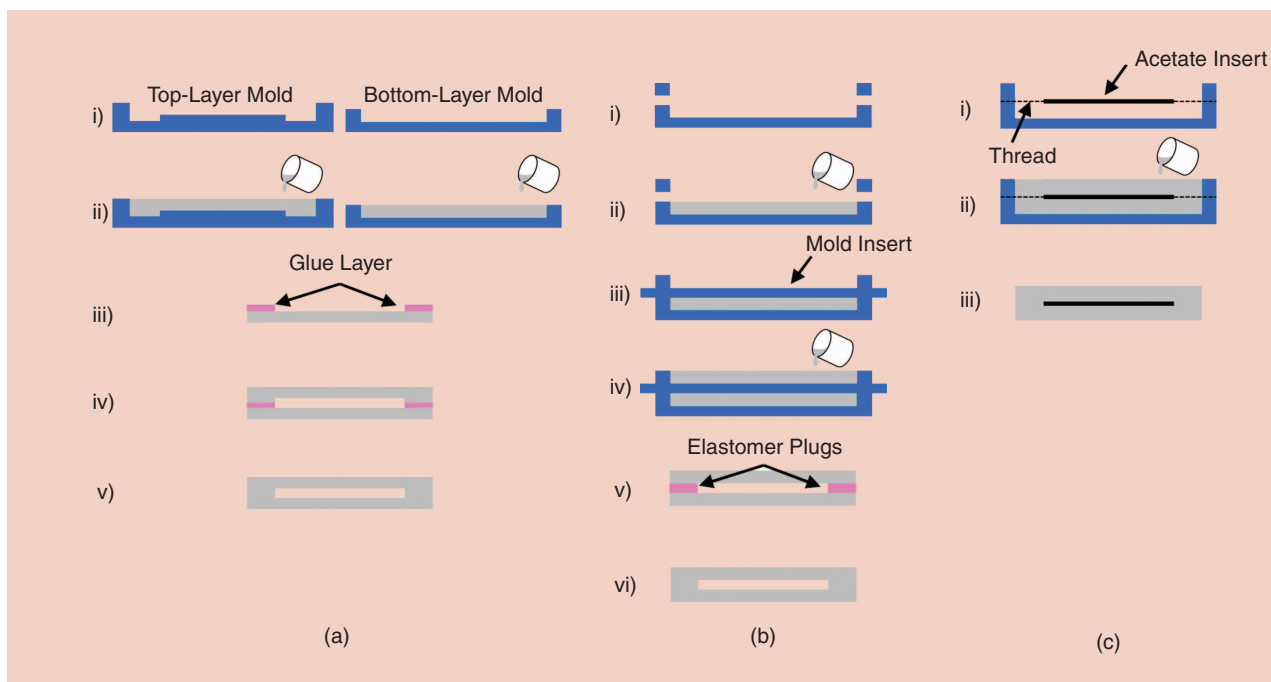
The comparison of three methods for manufacturing of soft fluidic actuators. (a) The two layers are cast separately and then glued together using a layer of silicon rubber. (b) A mold with an insert is used for casting. The insert is later removed and the bladder is plugged at both ends to create an airtight chamber. (c) A sacrificial acetate layer is held in the middle of the mold with thread, and it acts as a zero-thickness air chamber.
